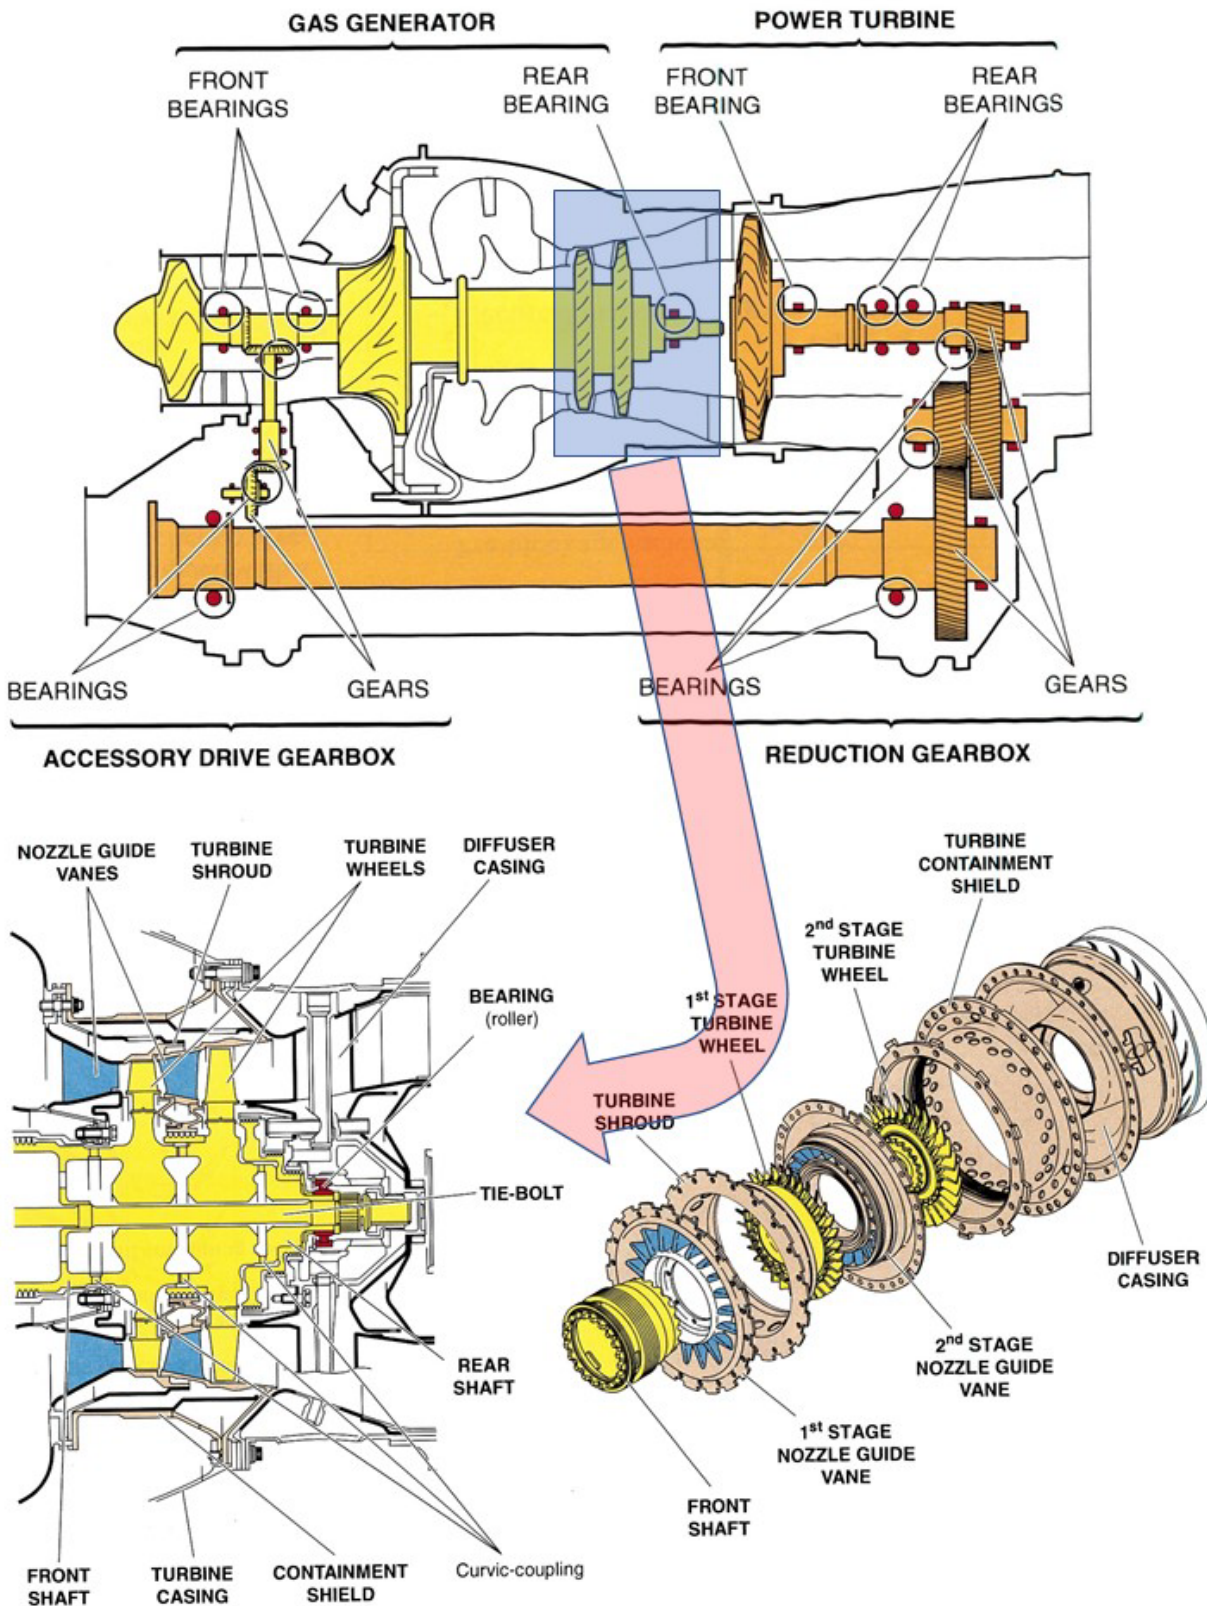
GAS GENERATOR (M03) CROSS-SECTION AND EXPLODED VIEW
